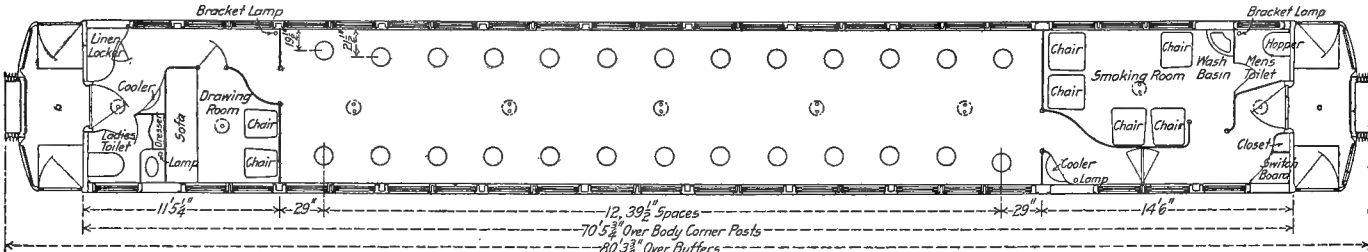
Floor Plan of Long Island Steel Parlor Car. Builder, American Car & Foundry Company.
